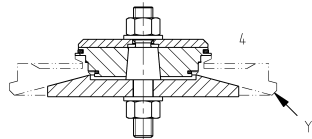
4=welding jig for housing connection T Y= 2.welding
